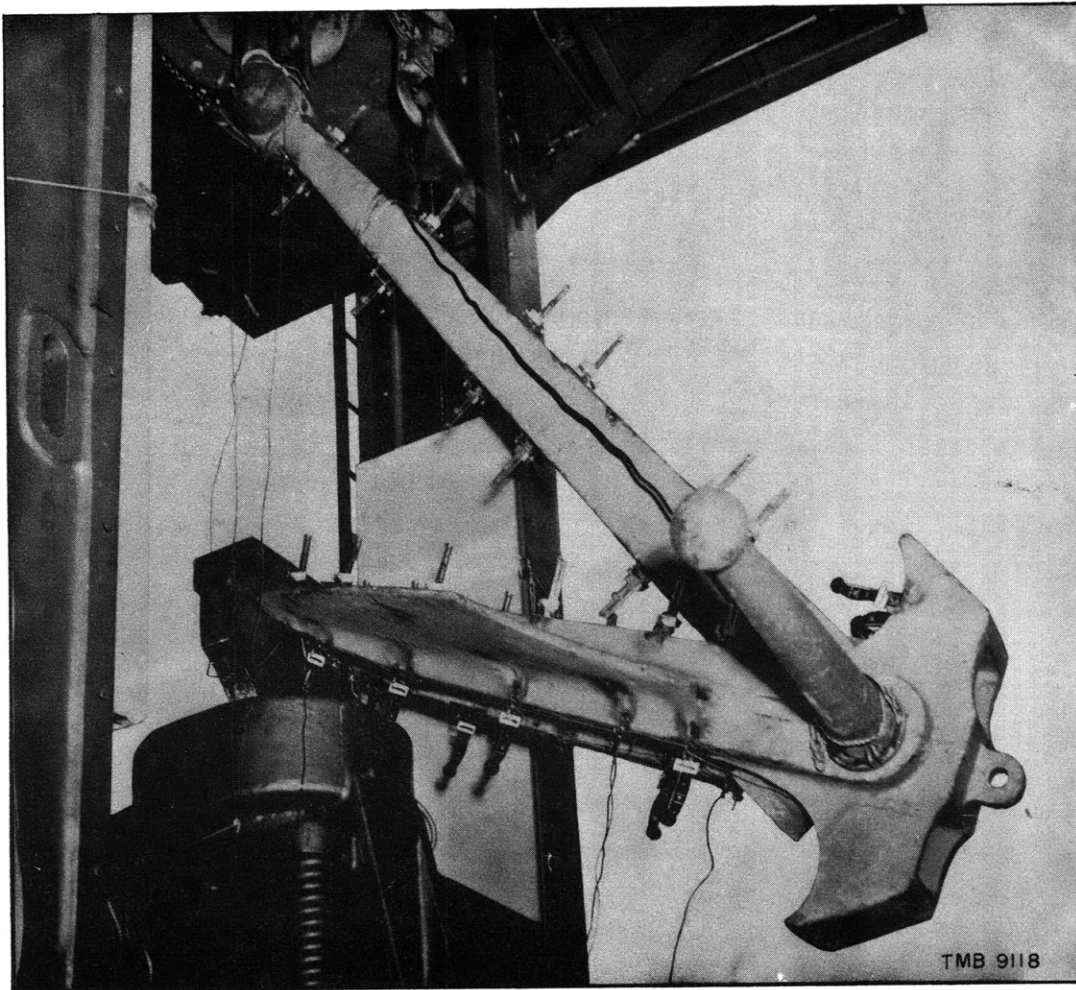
Side View of Anchor Mounted for Tensile Loading Test
